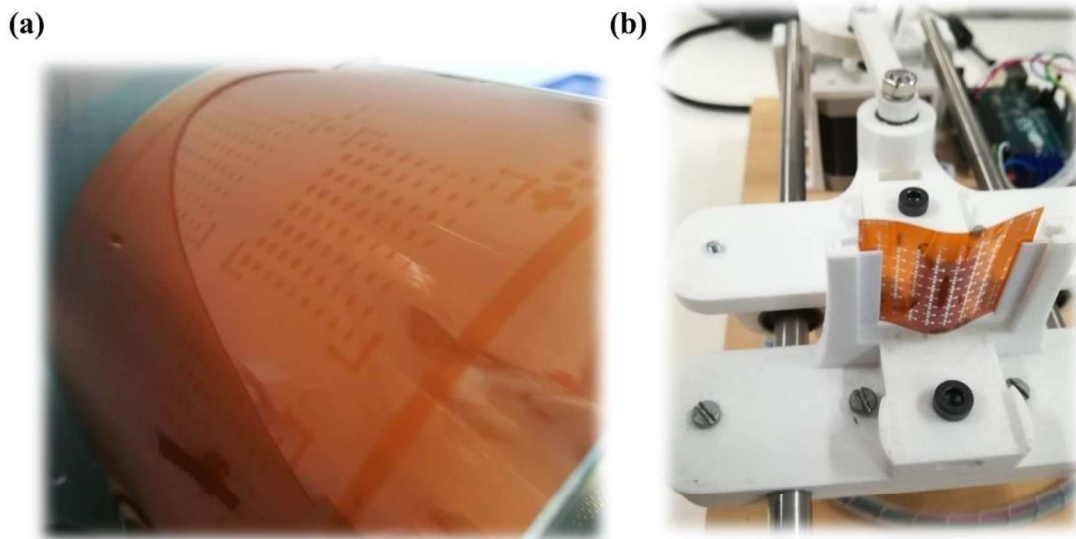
Photographs (a) after the dielectric printing in the flexographic machine and (b) of our homemade bending system.
